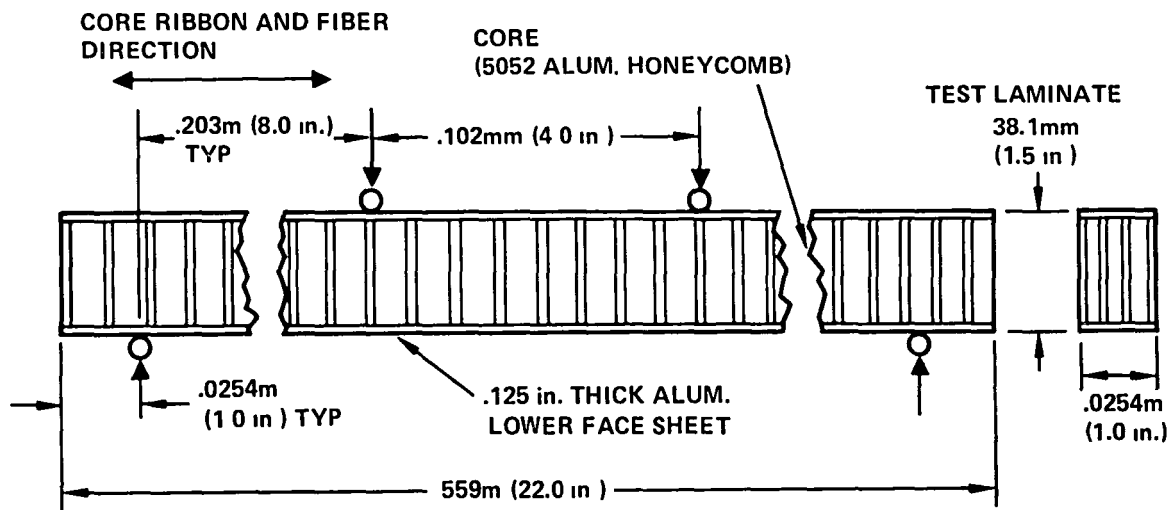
SANDWICH BEAM COMPRESSION TEST
